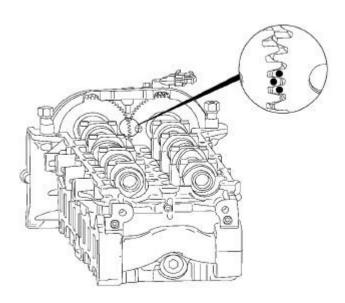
Camshafts Courtesy of CHRYSLER LLC
